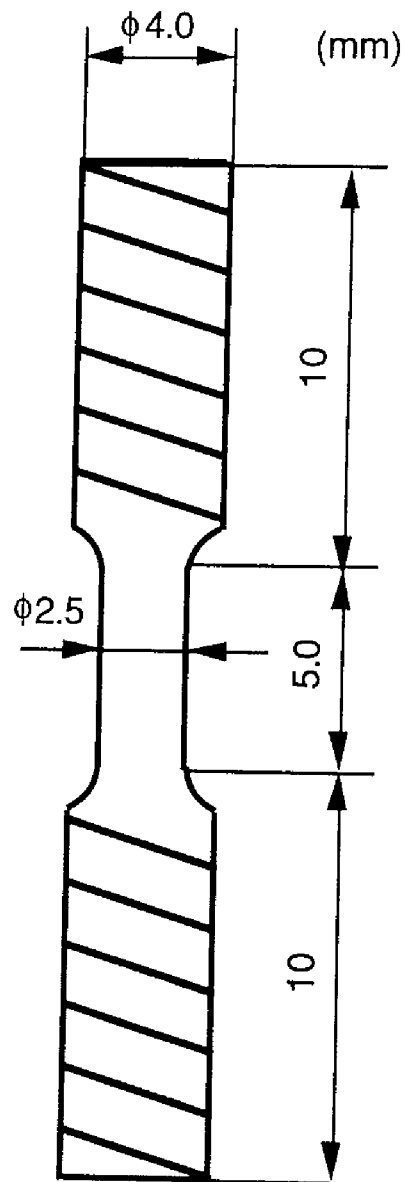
Geometry and dimension of a tensile test specimen.
